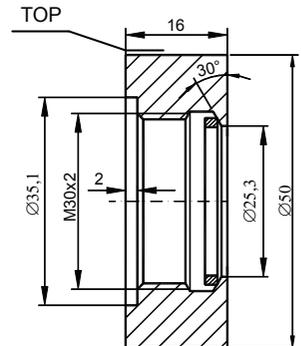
Weldable fitting ring for use with transmitters with CM30x2-type connector
